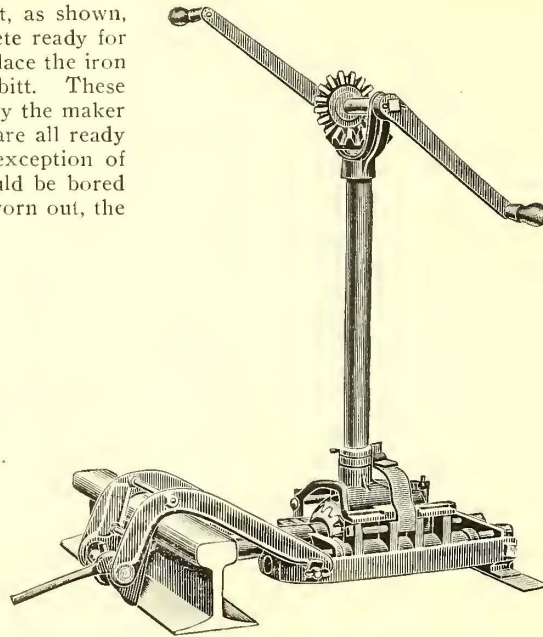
SELF-FEEDING DRILL IN WORKING POSITION
